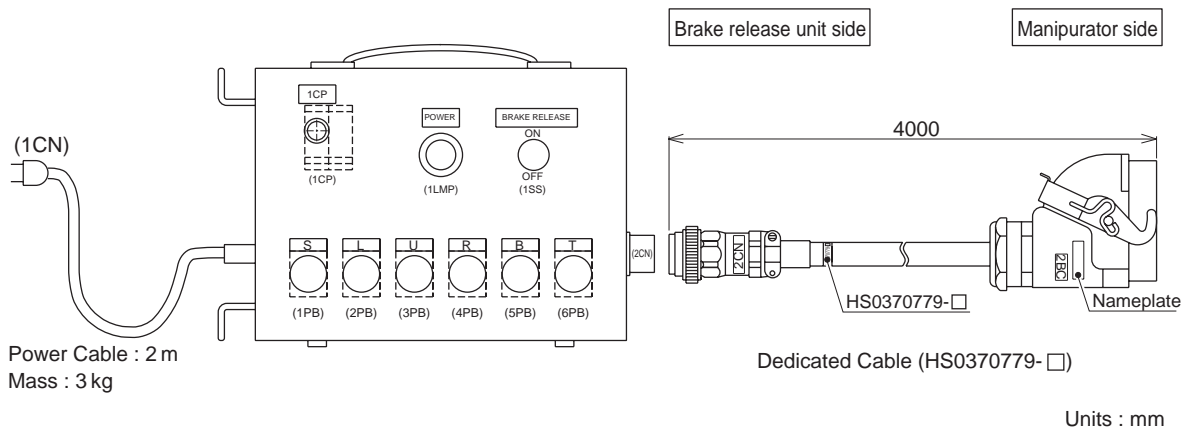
Brake release unit (Off-Panel Mounting Type)
